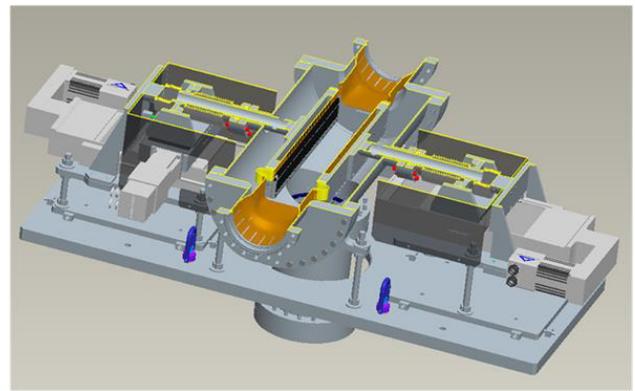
A cross-sectional view of the horizontal pickup vacuum chamber and assembly.
